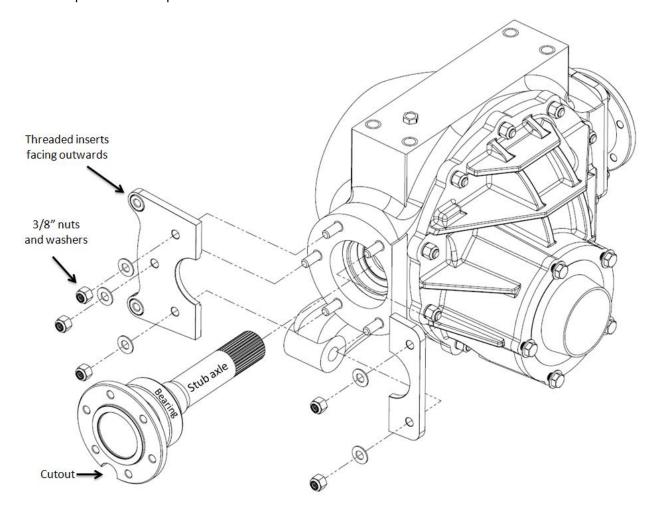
Passenger side axle (longer axle) being installed with the caliper plates (some parts removed for clarity).
